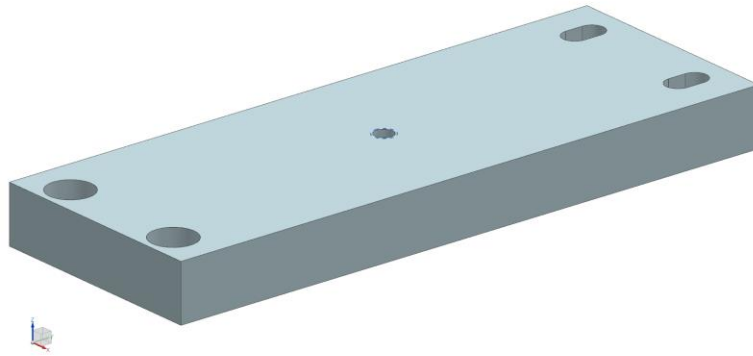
Isometric view of Base Frame Connecting Plate #3.
